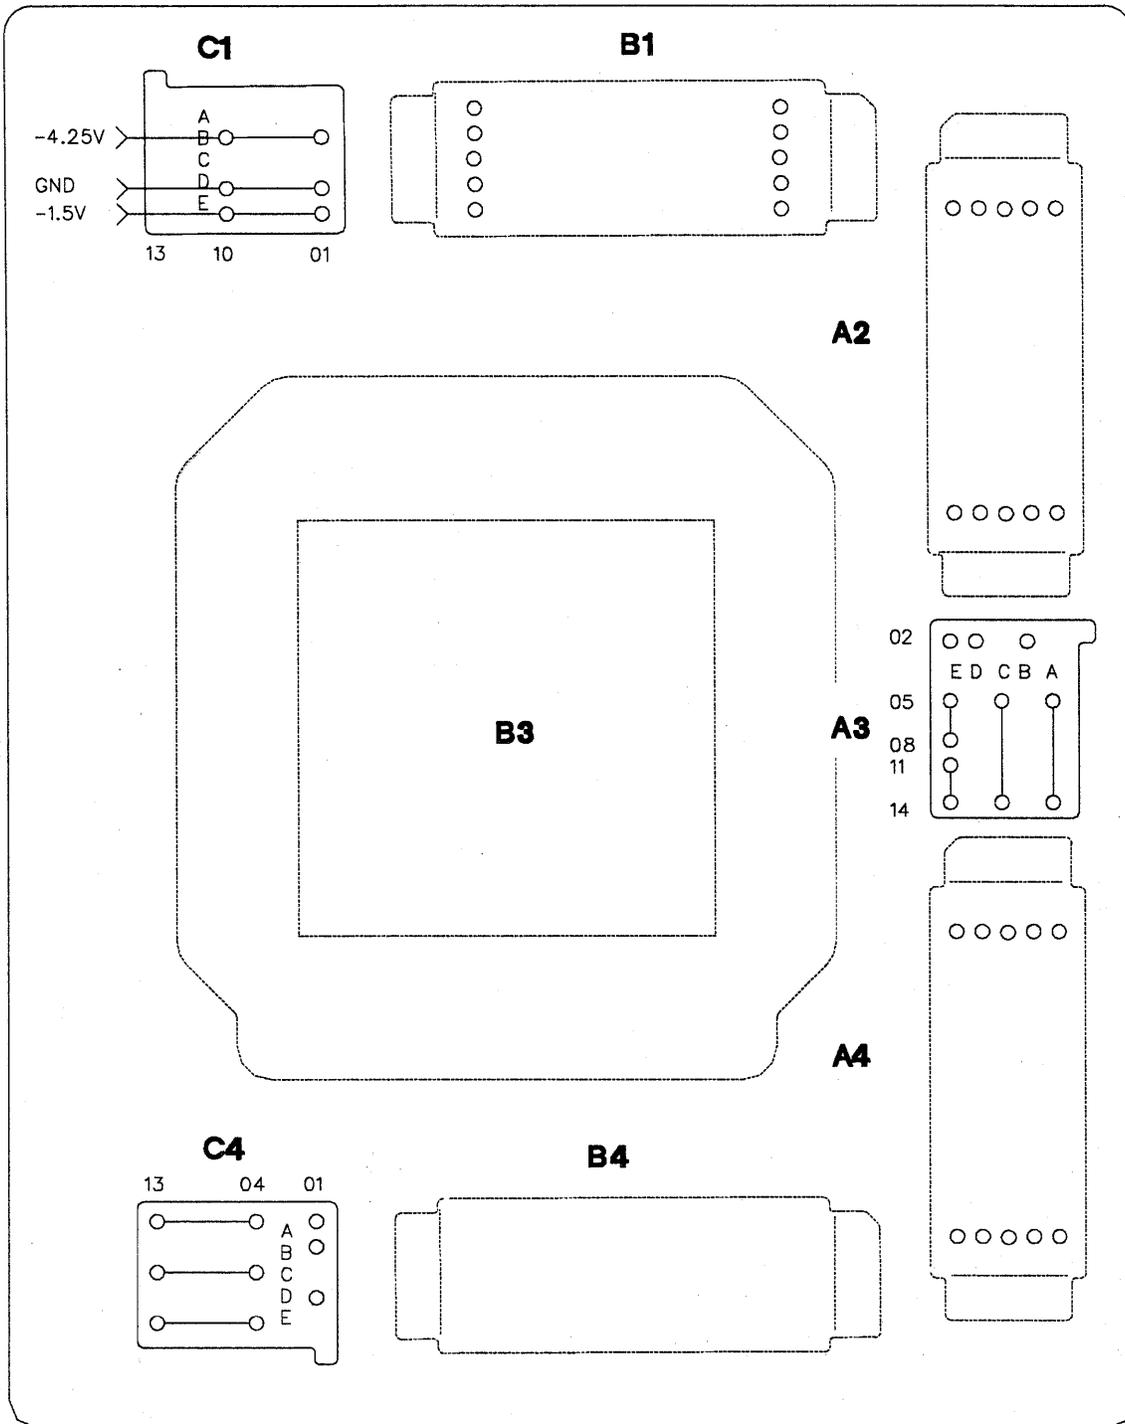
3745 TCM Board and Connectors (Rear)
